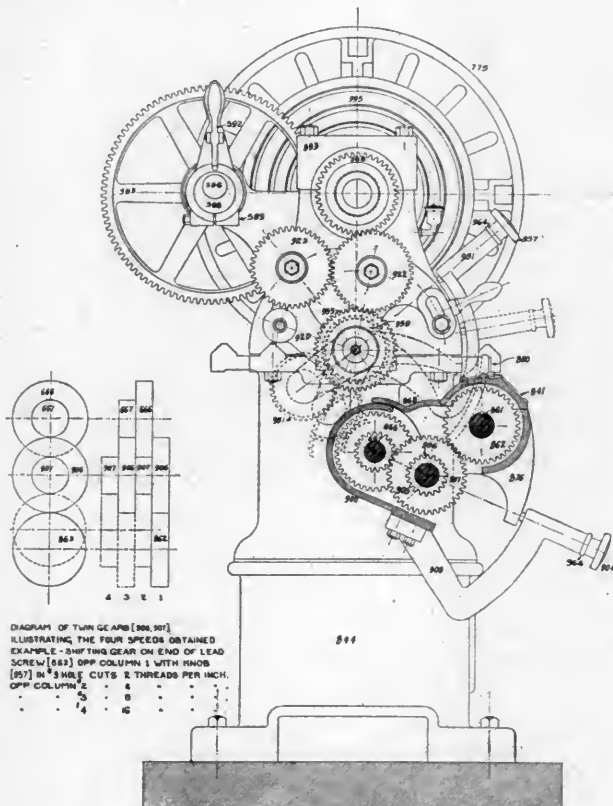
DETAILS OF THE POSITIVE GEARED FEEDING MECHANISMS WHICH ARE USED ON THE LATHES OF THE LODGE & SHIPLEY MACHINE TOOL COMPANY.
